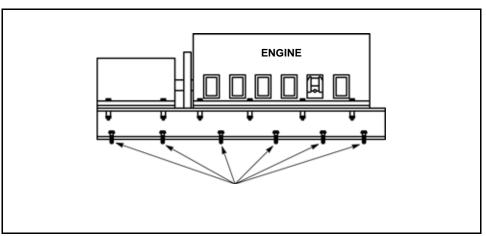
Adjust for Minimum Crankshaft Web Deflection per Section
